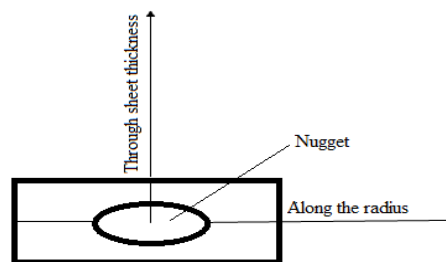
Schematic diagram showing direction of hardness measurement from the centre of the weld nugget of weld bond
